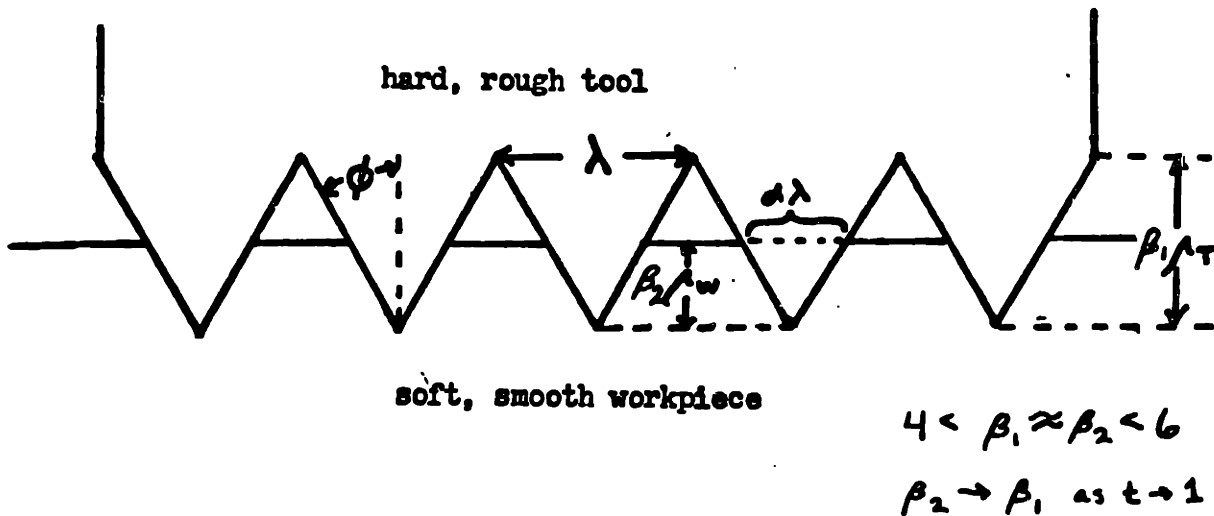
Indentation of soft, infinitely smooth workpiece by hard tool with rough "saw-tooth" surface.
